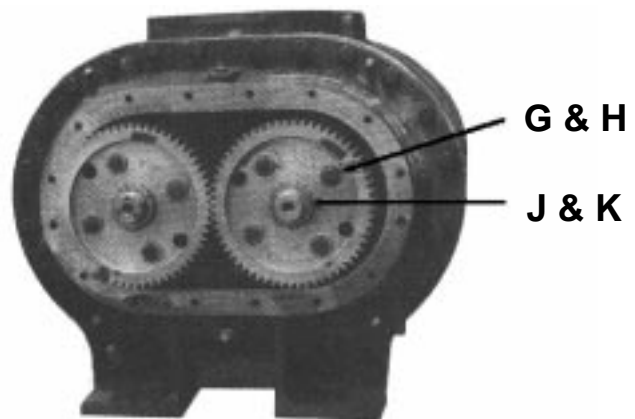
LOCATION OF TIMING GEAR BOLTS
